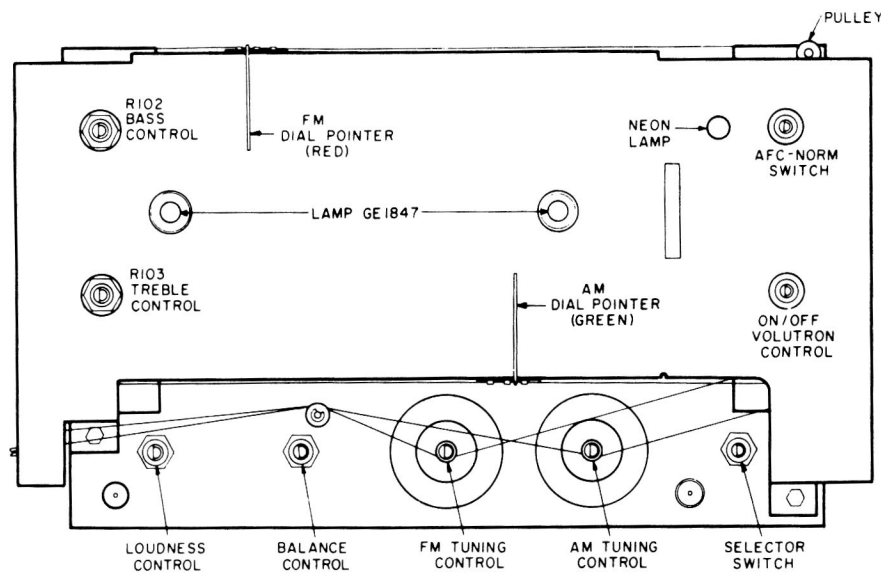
Front View of Chassis Showing Stringing and Control Knobs
